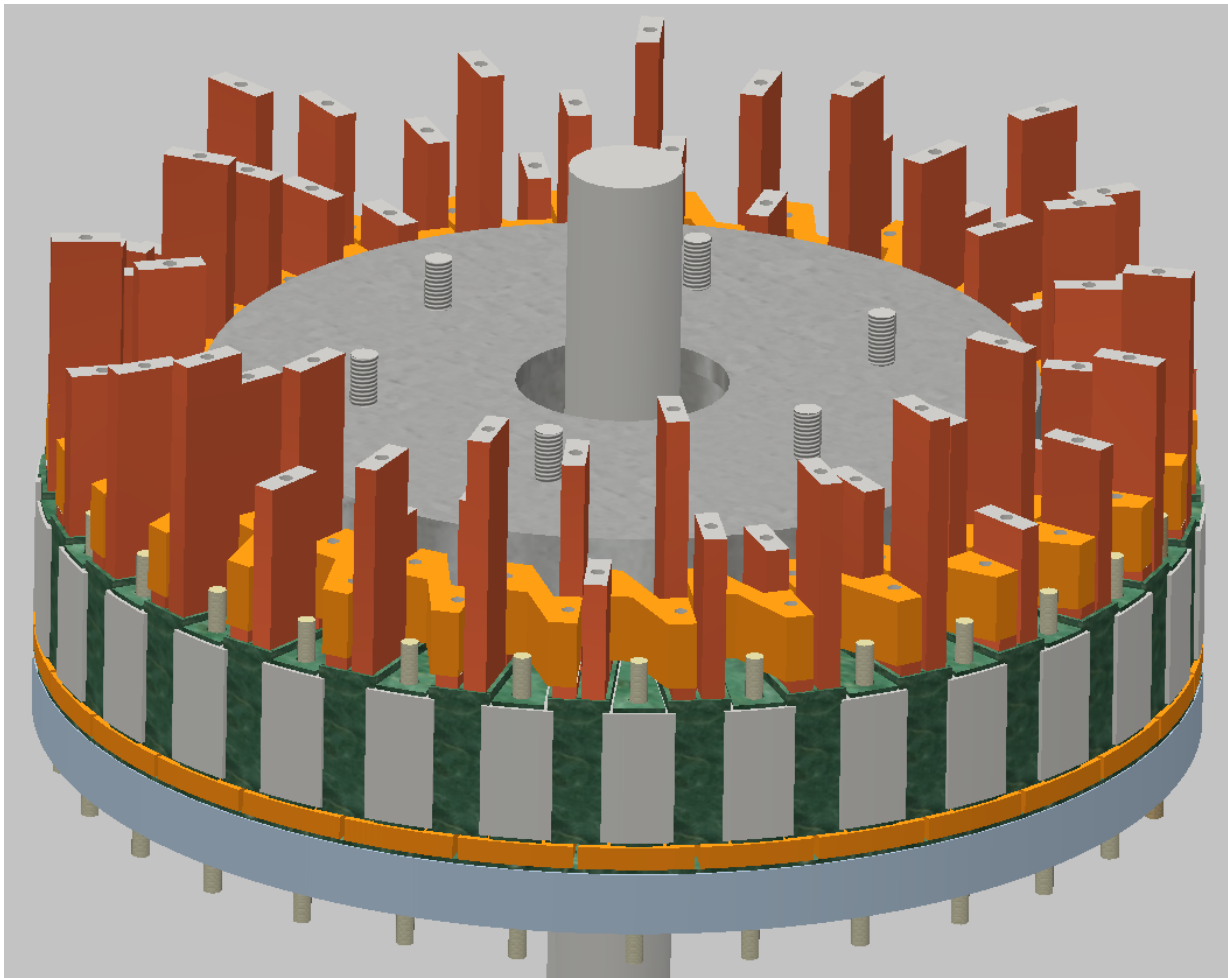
Majority of stator now assembled, with end-turn pieces, stator cap, shaft and ball bearings in place. Machine dimensions as described in Appendix B.
